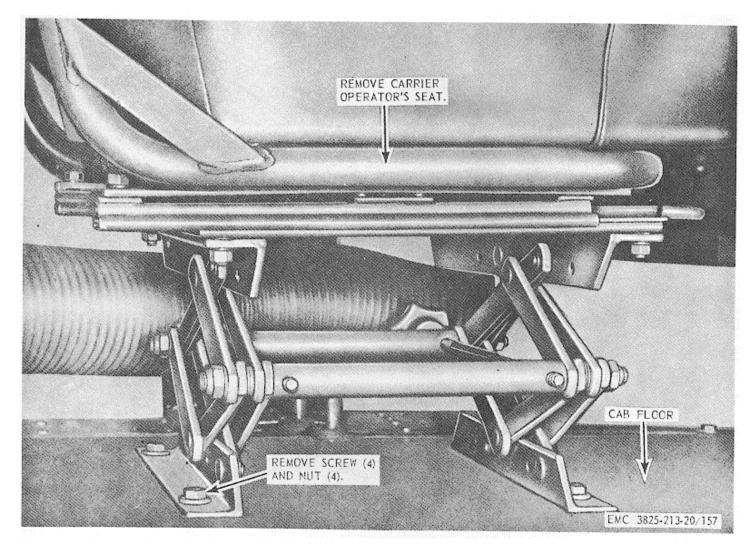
Carrier and plow operator's seat assembly, removal and installation.
